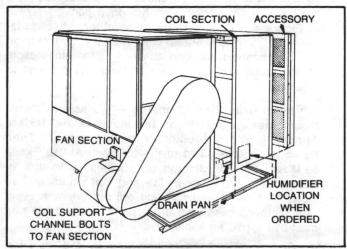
Exploded View of the Horizontal Draw-Thru Unit Size 63
